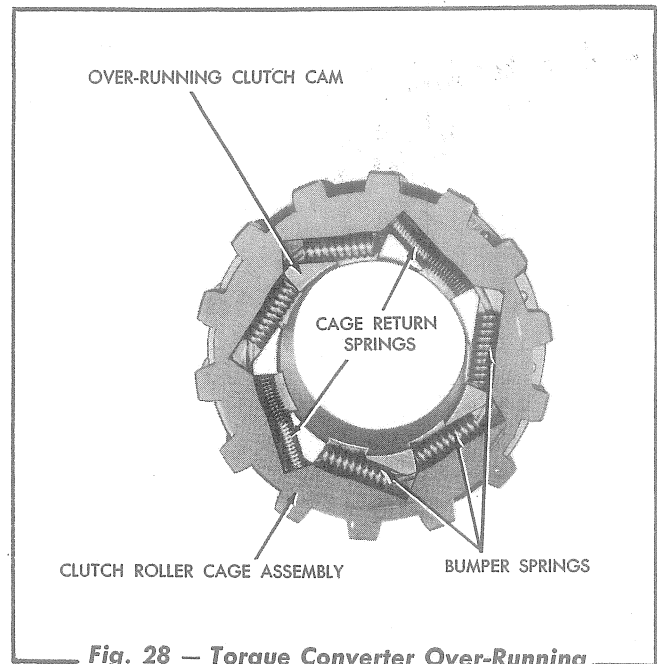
Torque Converter Over-Running Clutch Springs — Installed
